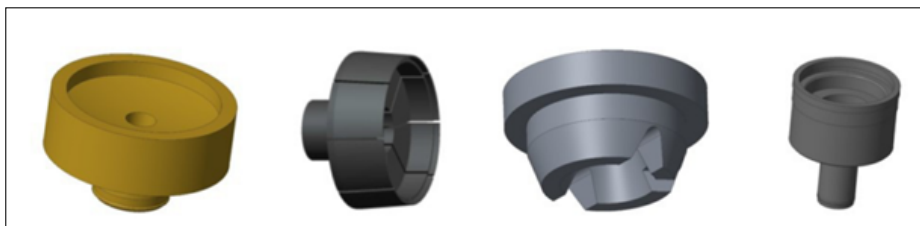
Standardized workpiece receptions for the optics workshop, from the left: vacuum chuck, collet for single lenses, precision blocking piece with cylindrical fitting, precision blocking piece for spectacle lenses
